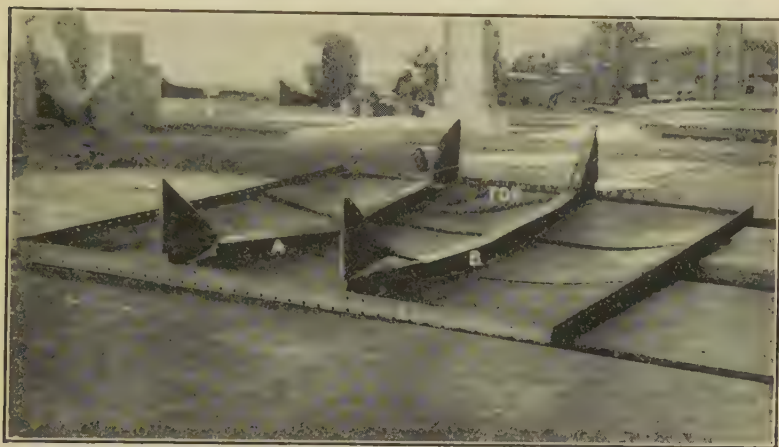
Type A welded bulkhead after removal from tank.
